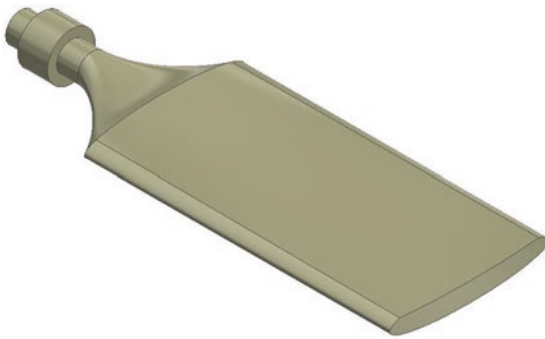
3D-Model of a roto-moulded rotor blade used for the construction of ventilation fans
